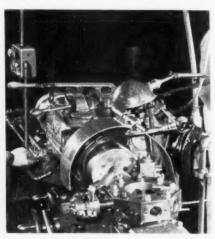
Air operated, two jaw chuck for holding fittings on high production operation on a Warner & Swasey No. 2. Note die heads on turret.
